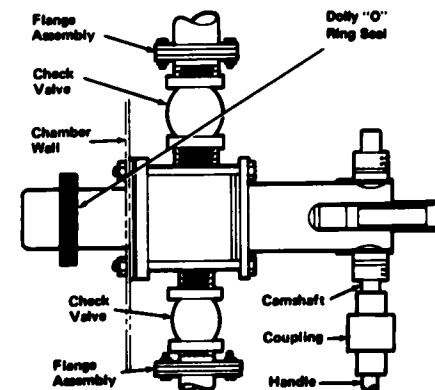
MANIFOLD COUPLER DIVERTER ASSEMBLY.
